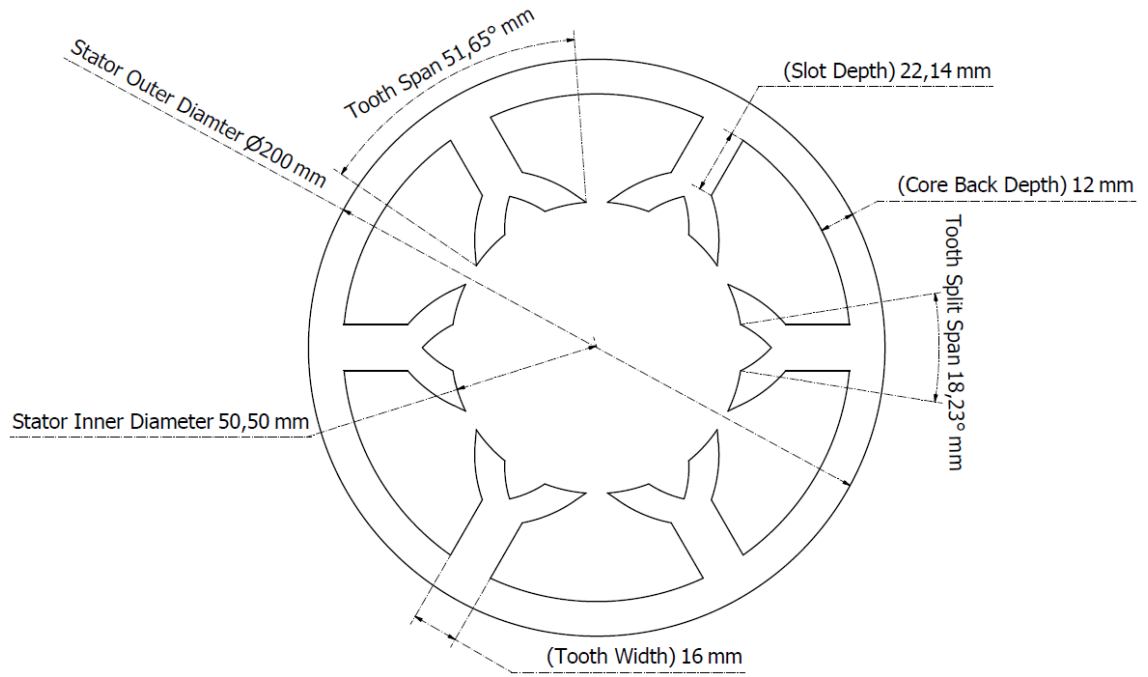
Stator Dimensions of the New Modified Flux Concentrated Split Tooth PM Machine.
